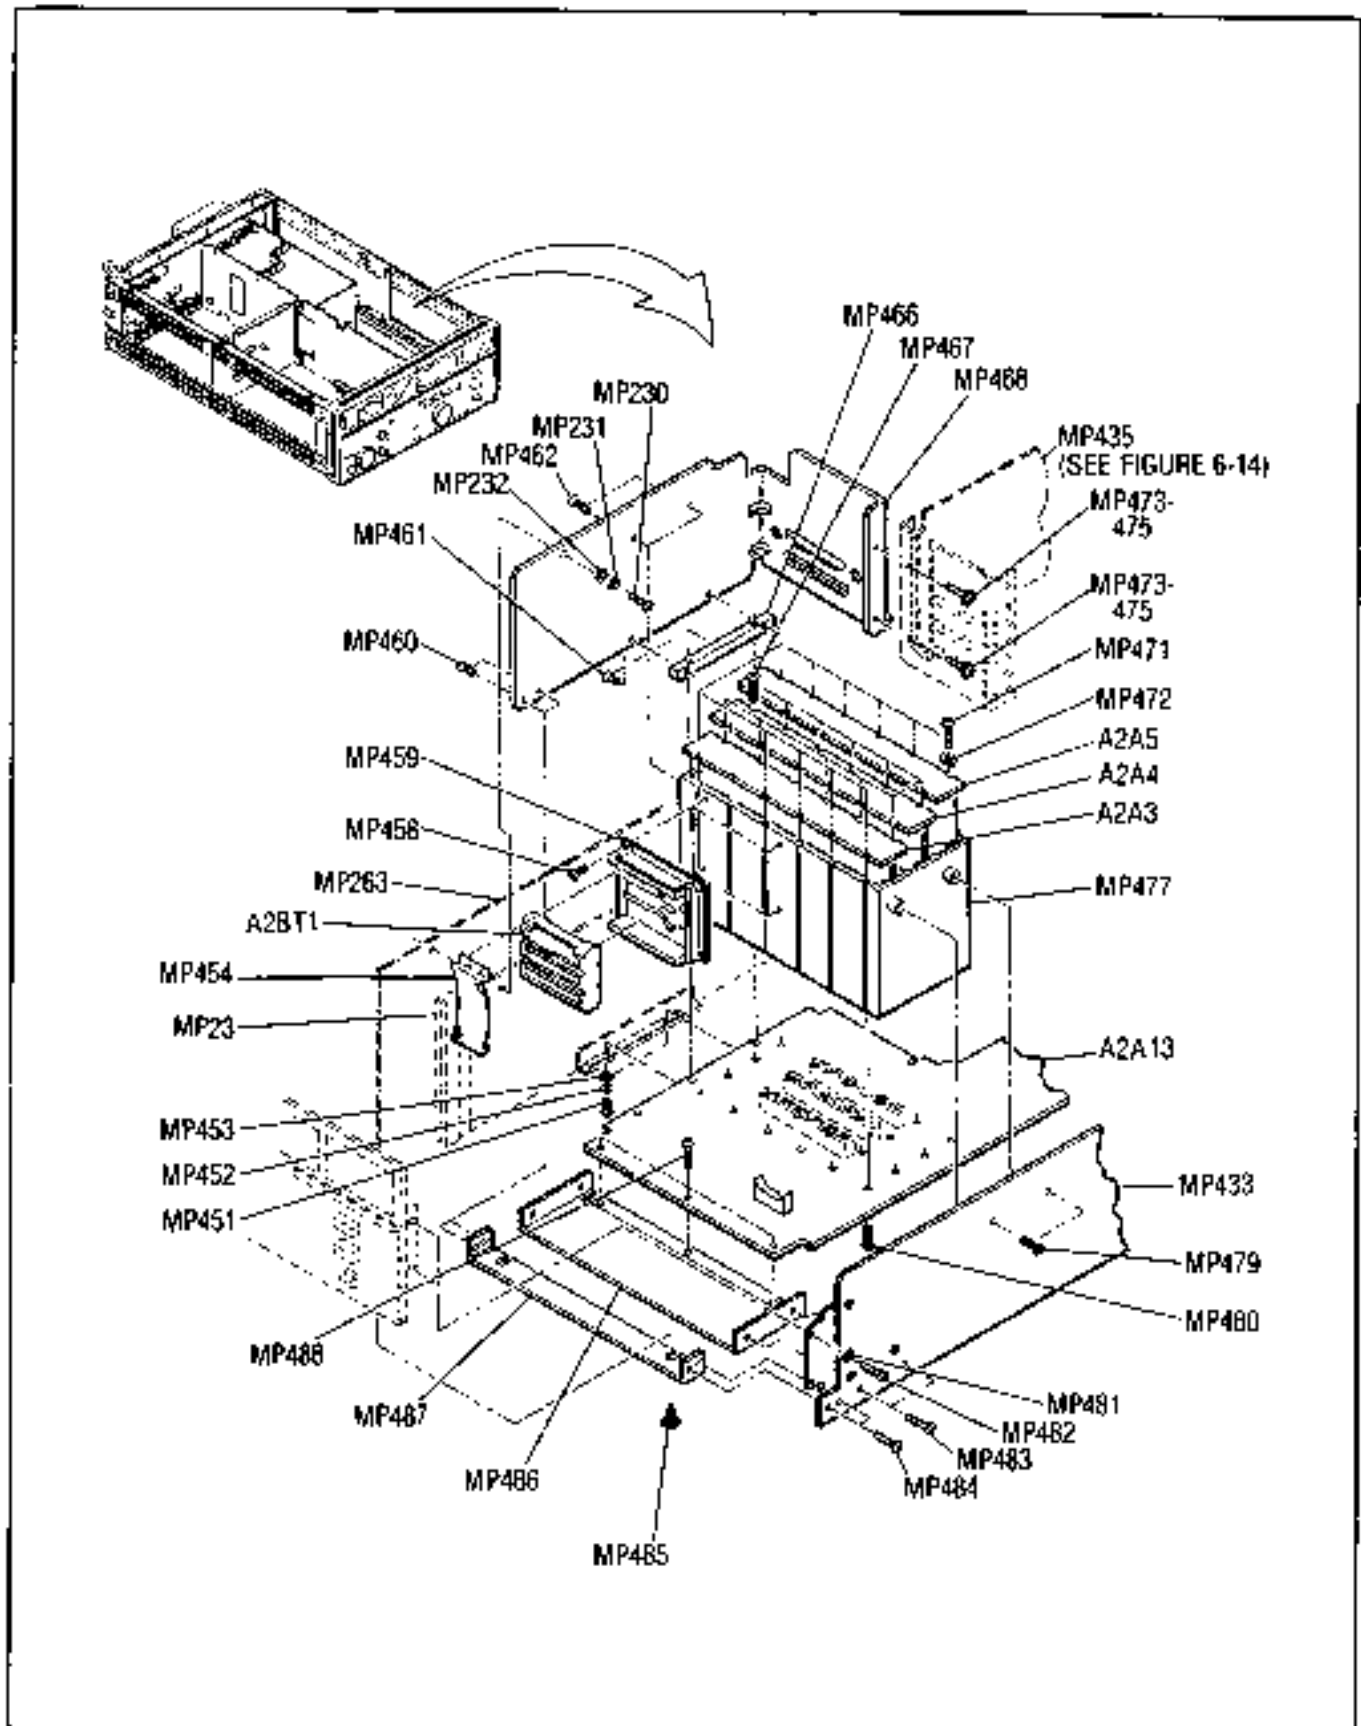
P/O A2 Controller Assembly Illustrated Parts Breakdown
